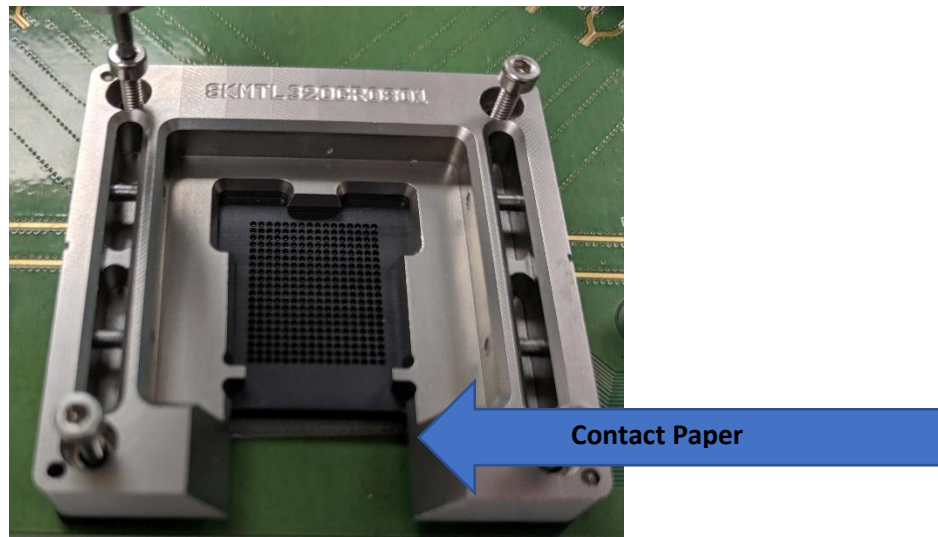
Socket Reassembly with Contact Paper between the Socket and Test Board
